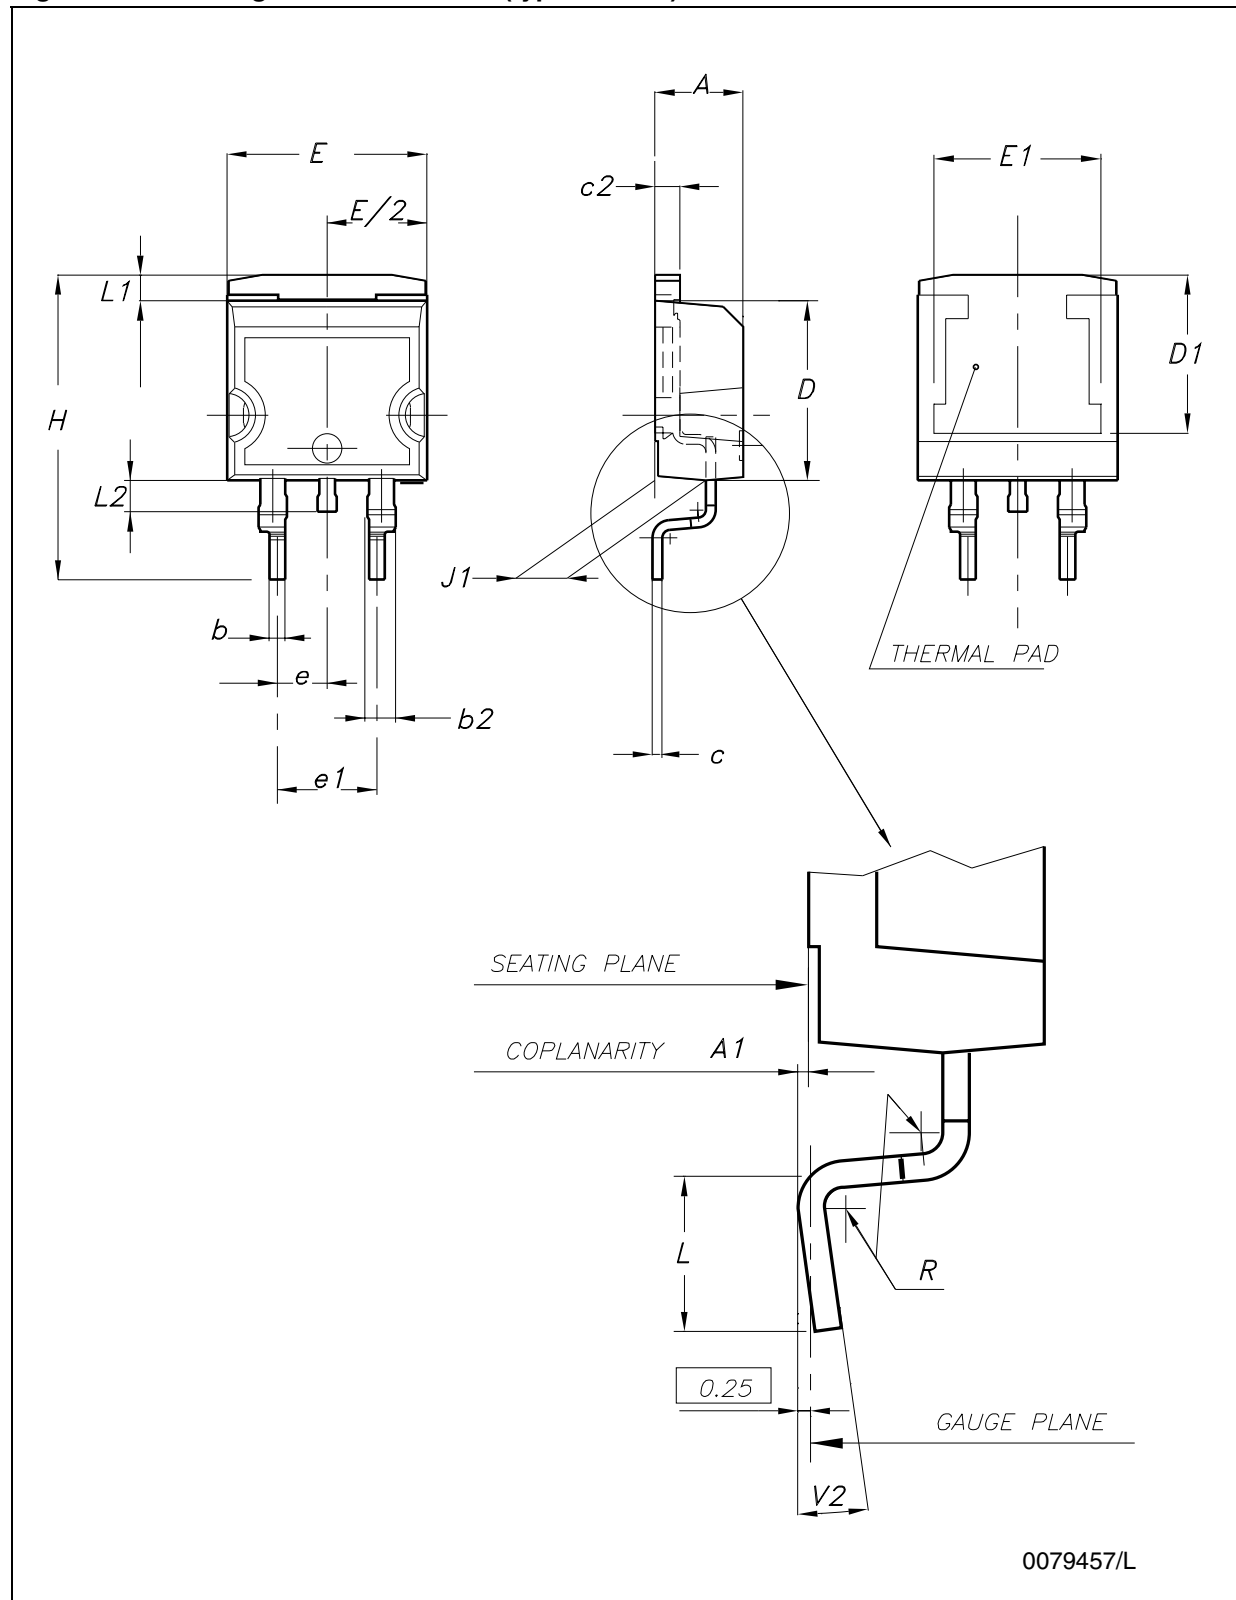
Drawing dimension D<sup>2</sup>PAK (type STD-ST)
